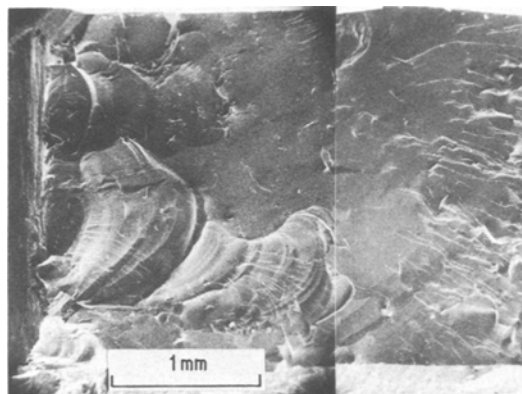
Fracture surface of compacted material. Notch is shown at left and the final fracture is near the right.
